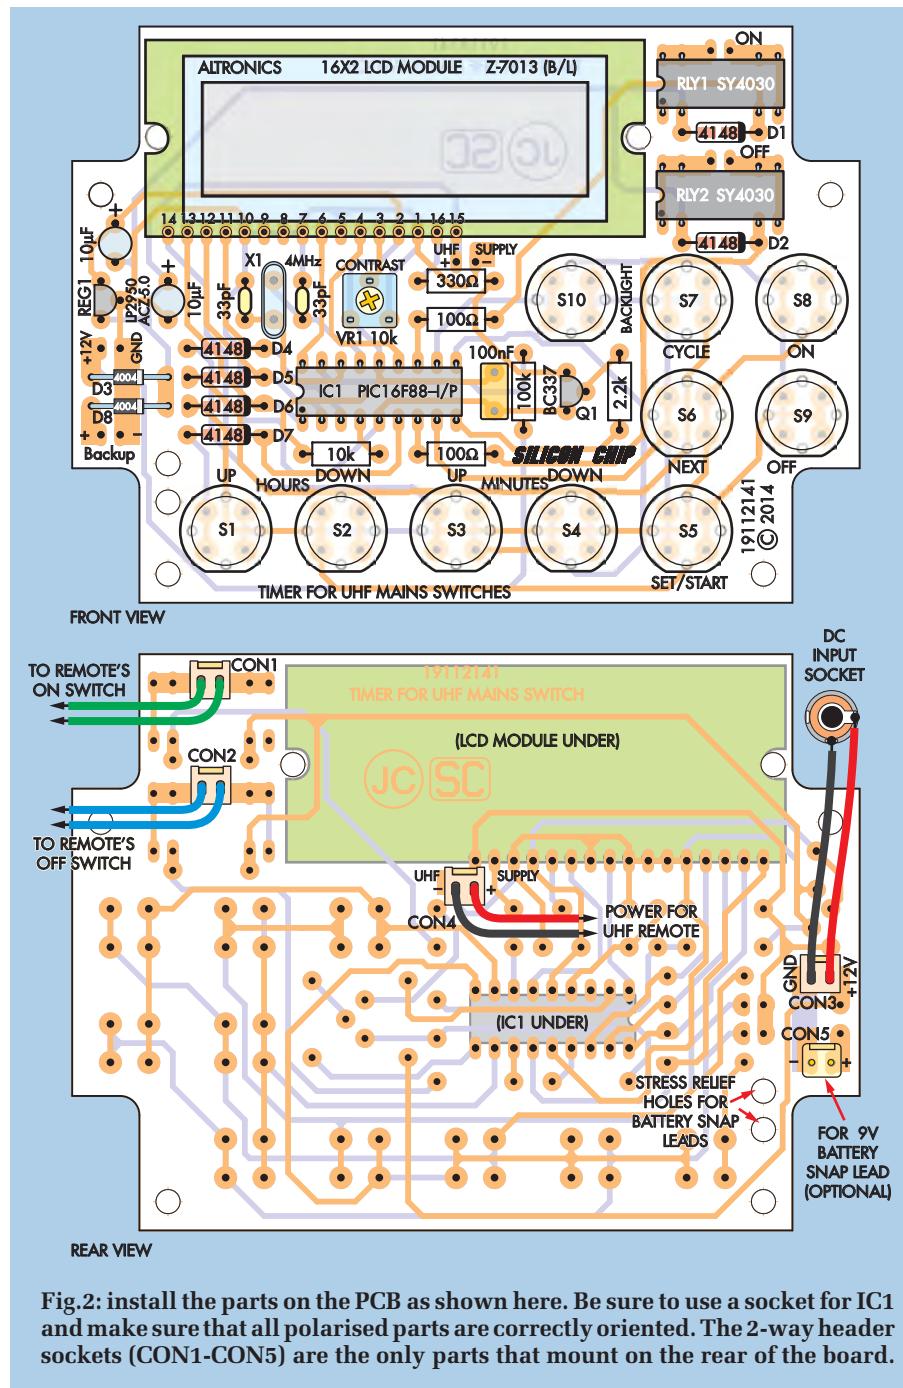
install the parts on the PCB as shown here. Be sure to use a socket for IC1 and make sure that all polarised parts are correctly oriented. The 2-way header sockets (CON1-CON5) are the only parts that mount on the rear of the board.
